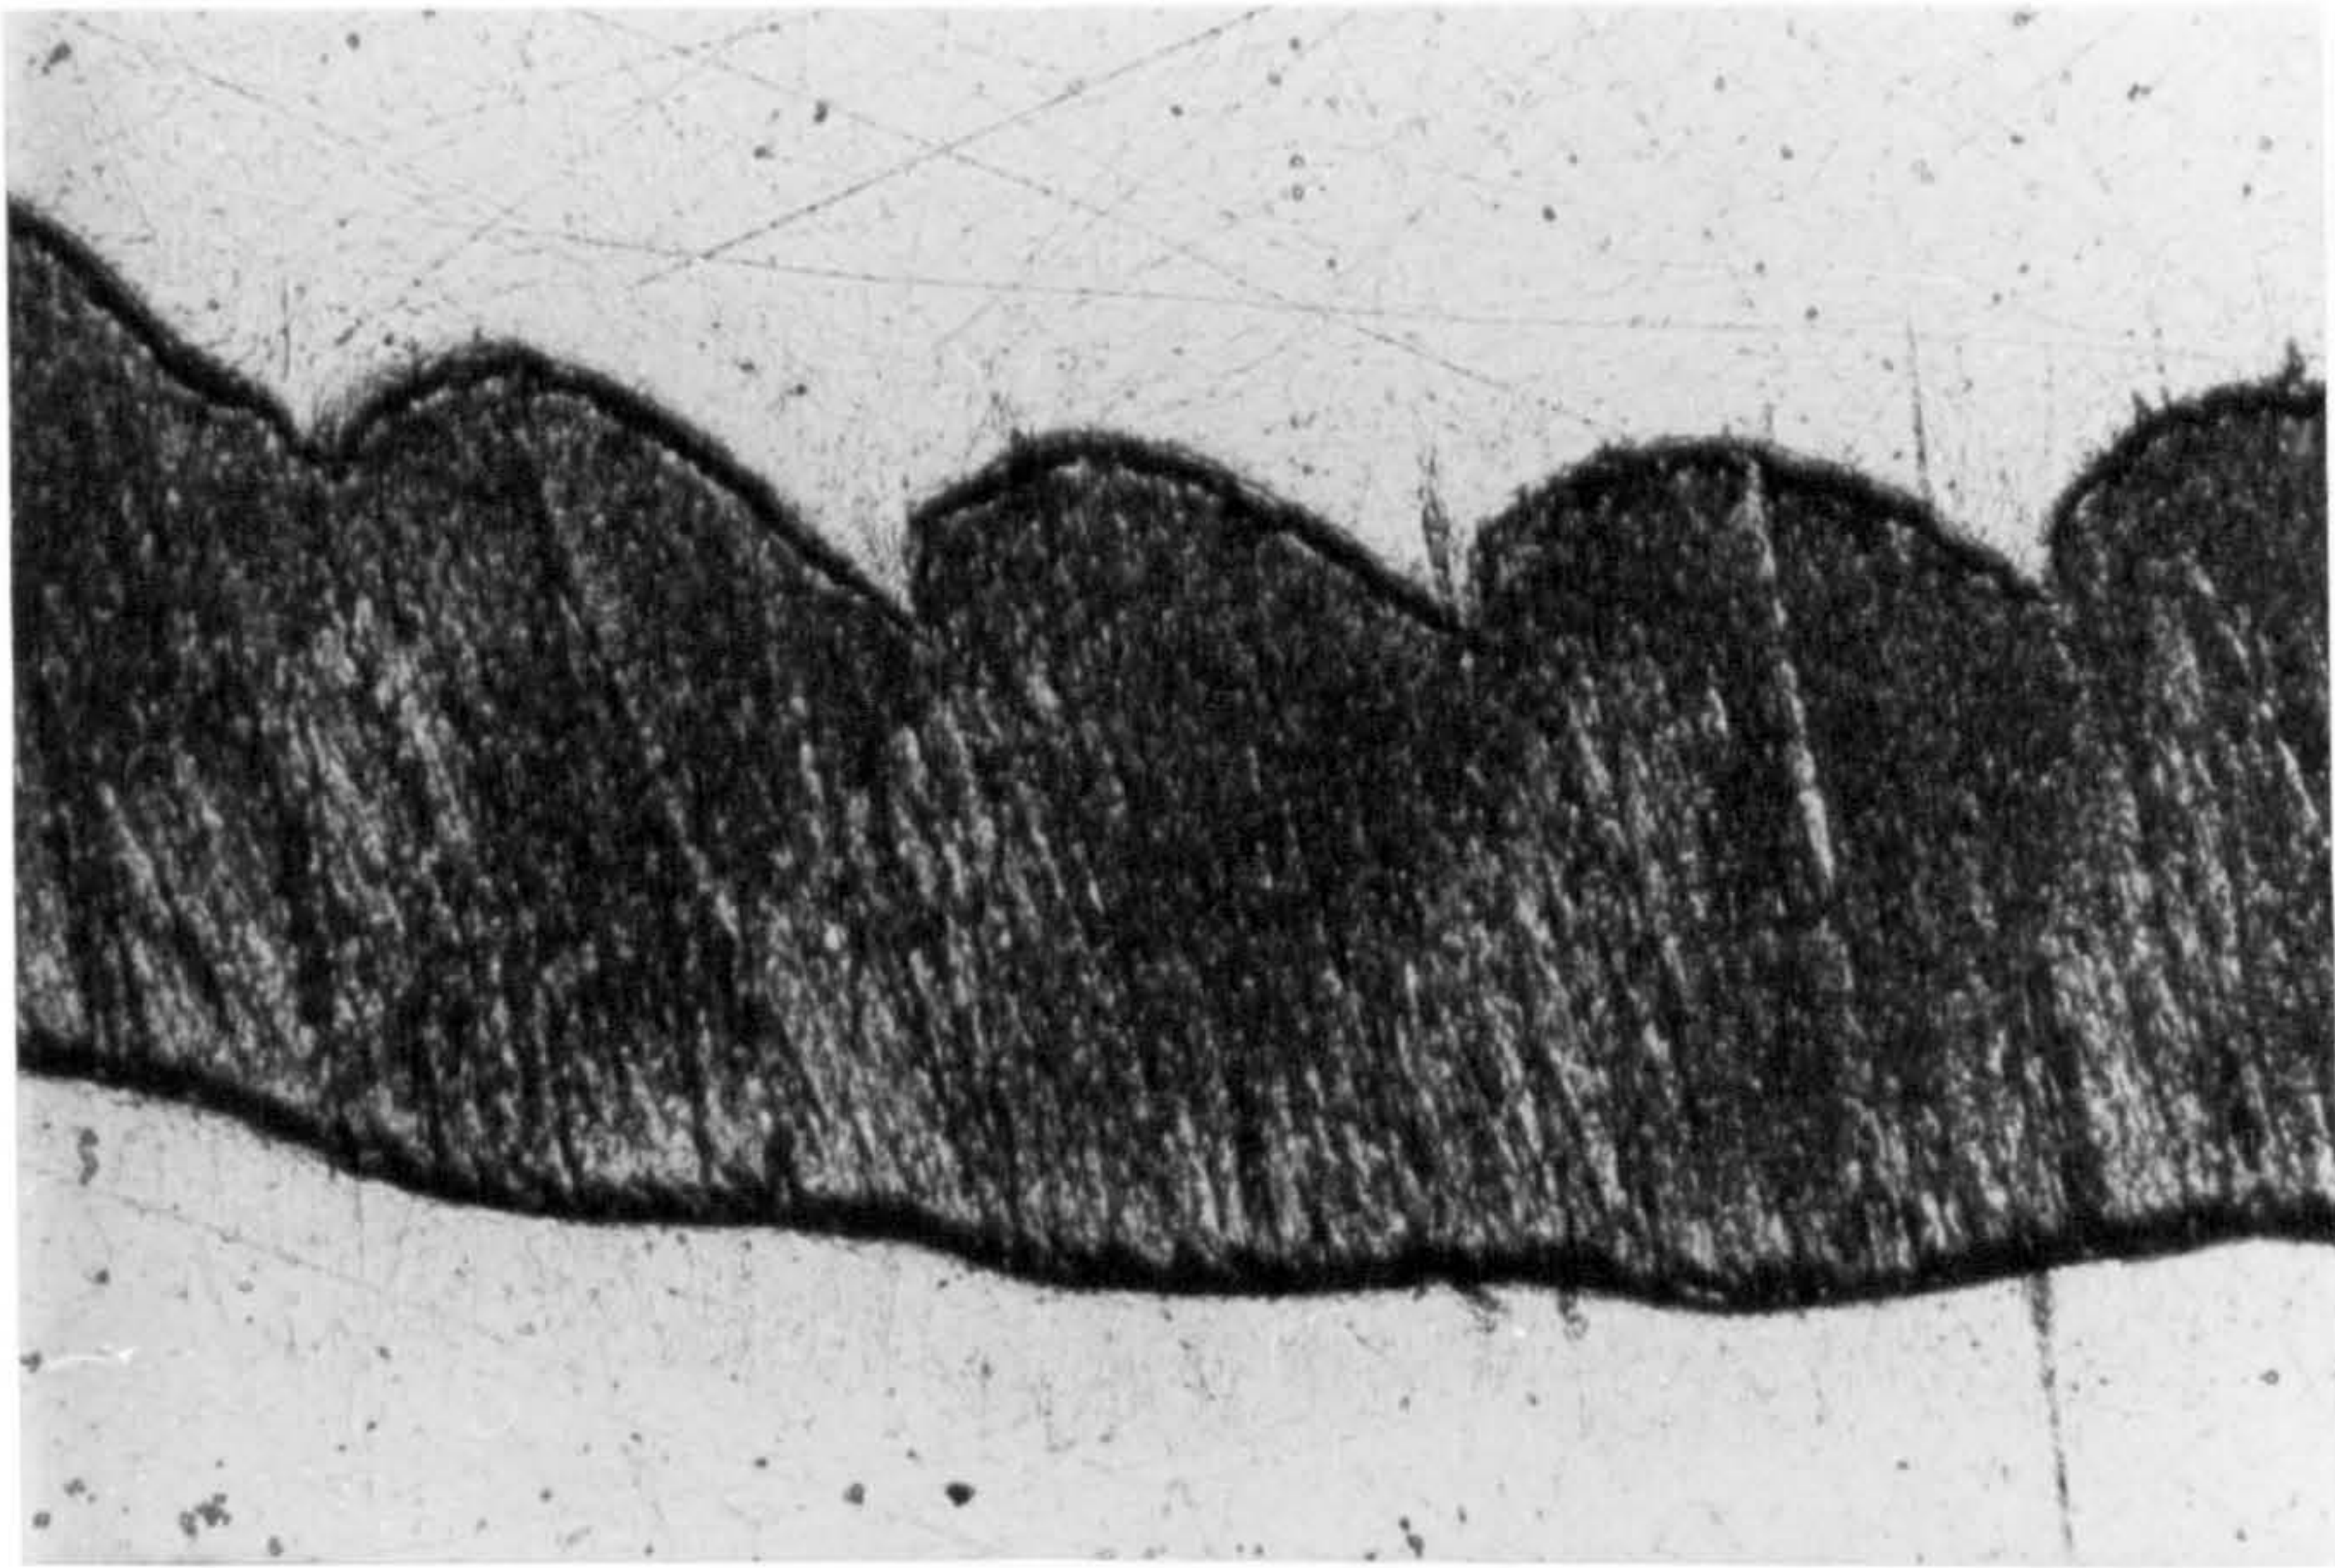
Enlarged view of segmented HDPE chip shown in Fig 46 (X100)
